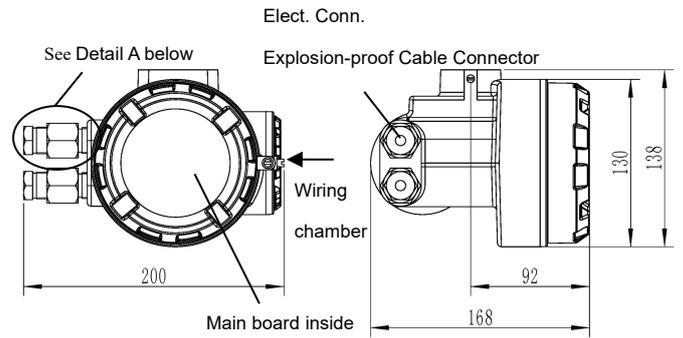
Installation dimensions of T1000 Transmitter & Mounting Holder for separated Flowmeter
